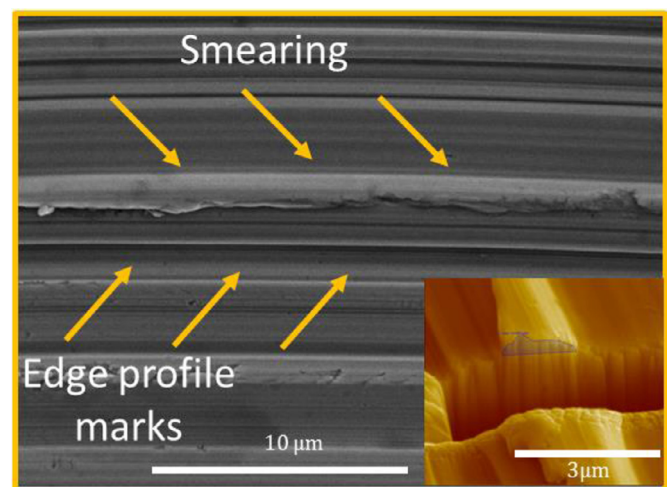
Smearing and cutting edge profile marks on ball nose milled surface. Bottom right: focused ion beam cross section of smearing feature [30].
